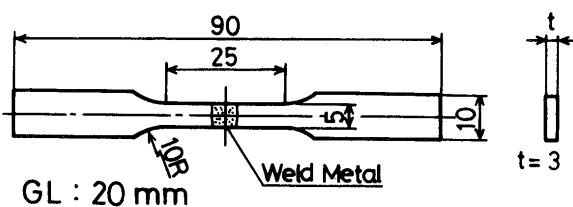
Tensile specimen used for welded joint and base metal
